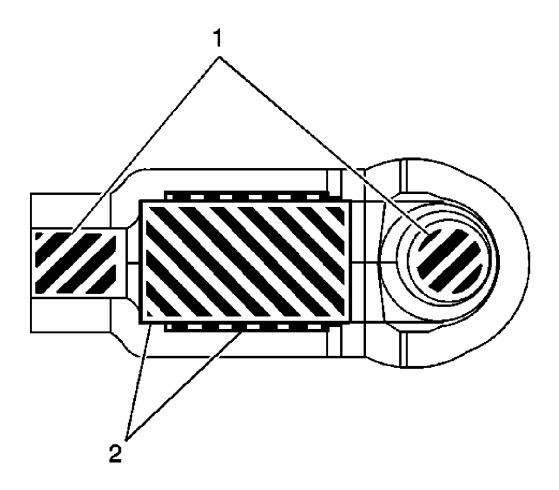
Identifying Roller Pivot Pocket (2) & Valve Slot Areas (1) Of Camshaft Followers
